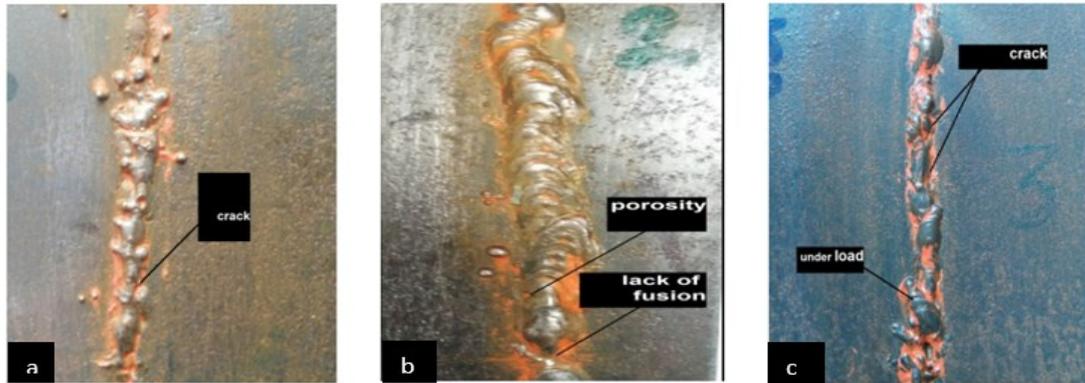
Welding defects at (a) A=250, S=112 (b) A=250, S=118 (c) A=250, S=123.
